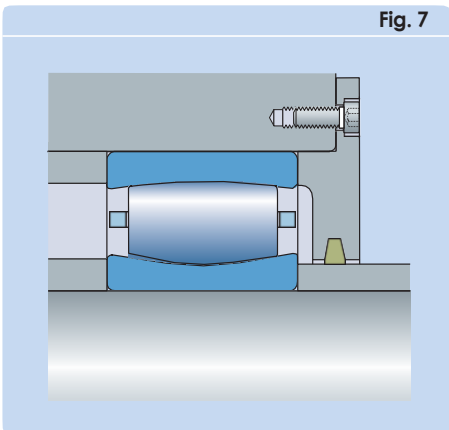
Spacer sleeves used to axially locate the inner and outer rings
